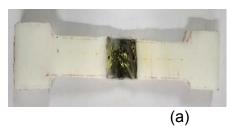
Friction Stir Welded specimens of HDPE.
